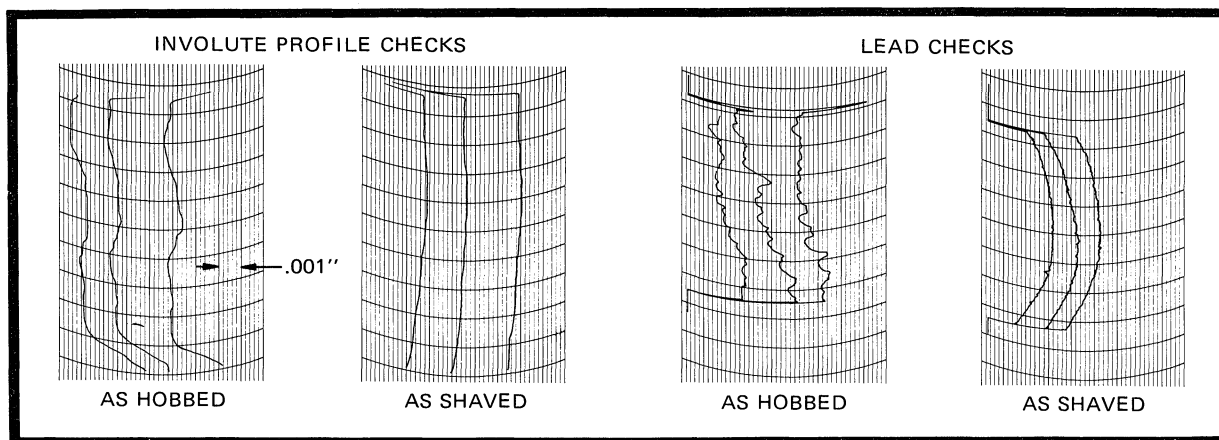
Charts showing improvement in lead and profile when 8620, 5.7-D.P., 20-deg, P.A., 3.85-in. P.D. hobbed gears are crown-shaved with a stock removal of 0.011-in. over pins.
